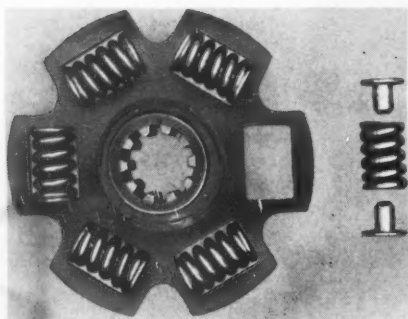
Clutch plate utilizing six spring-rivet assemblies
